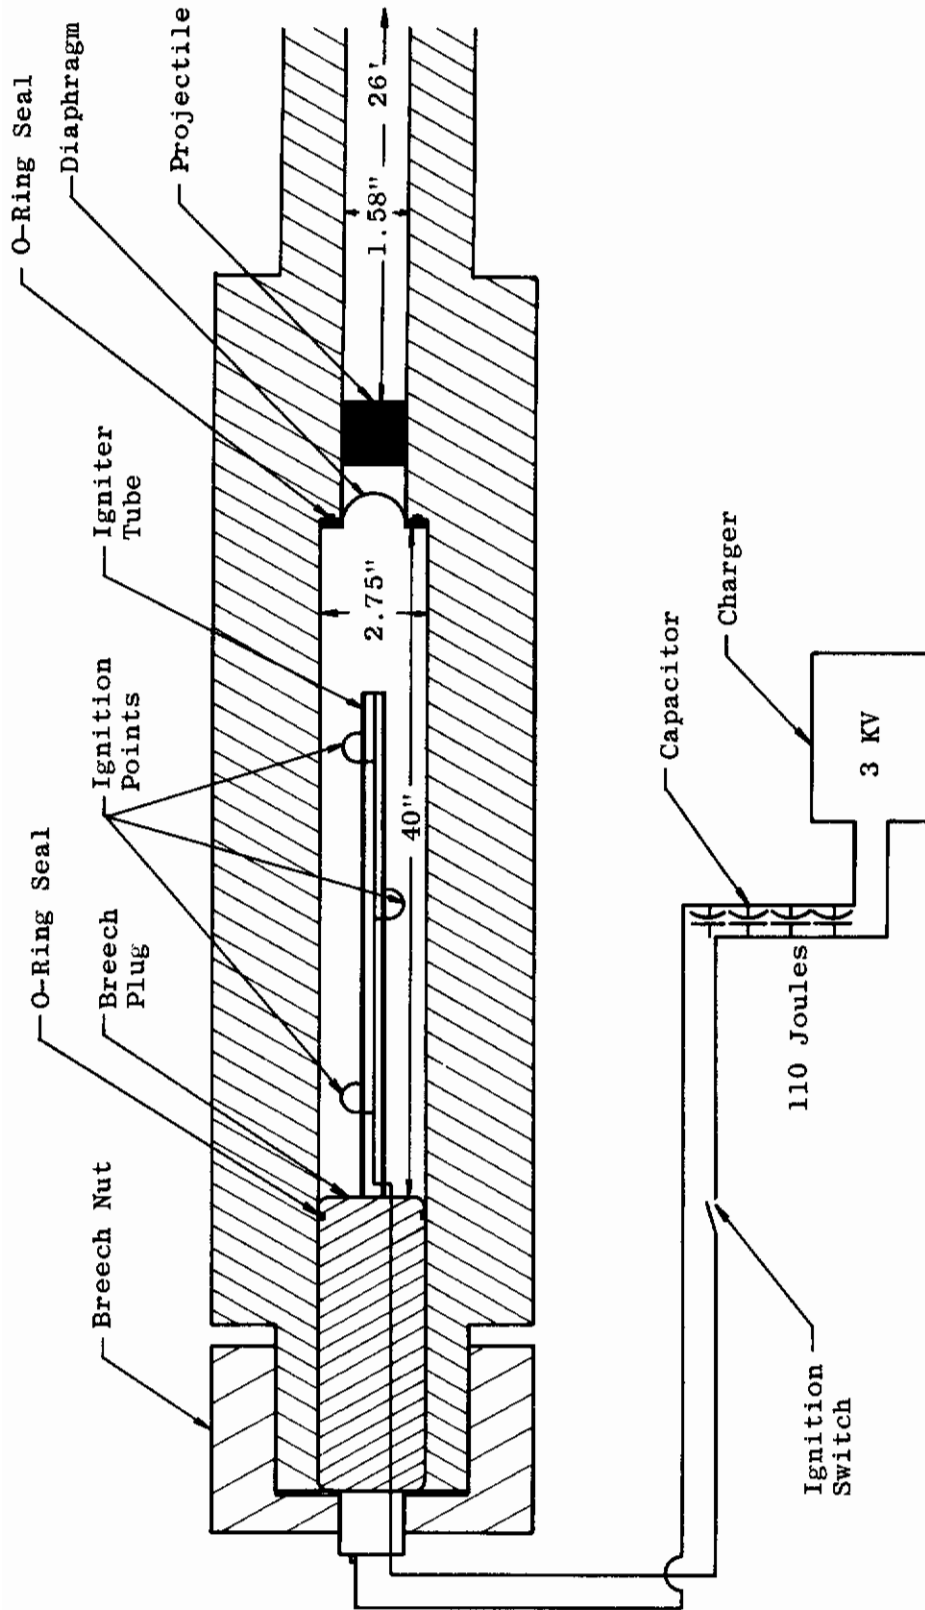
Combustion Gun Chamber Assembly and Ignition Diagram
